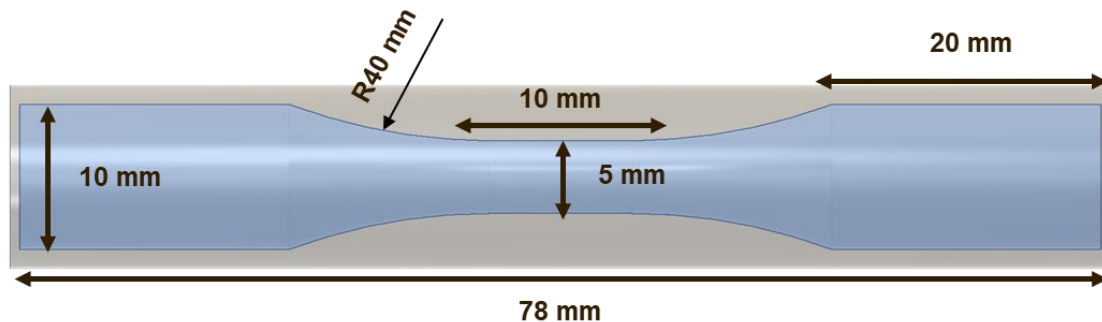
The geometry of fatigue specimens according to ASTM E466. All dimensions are in millimeters.
